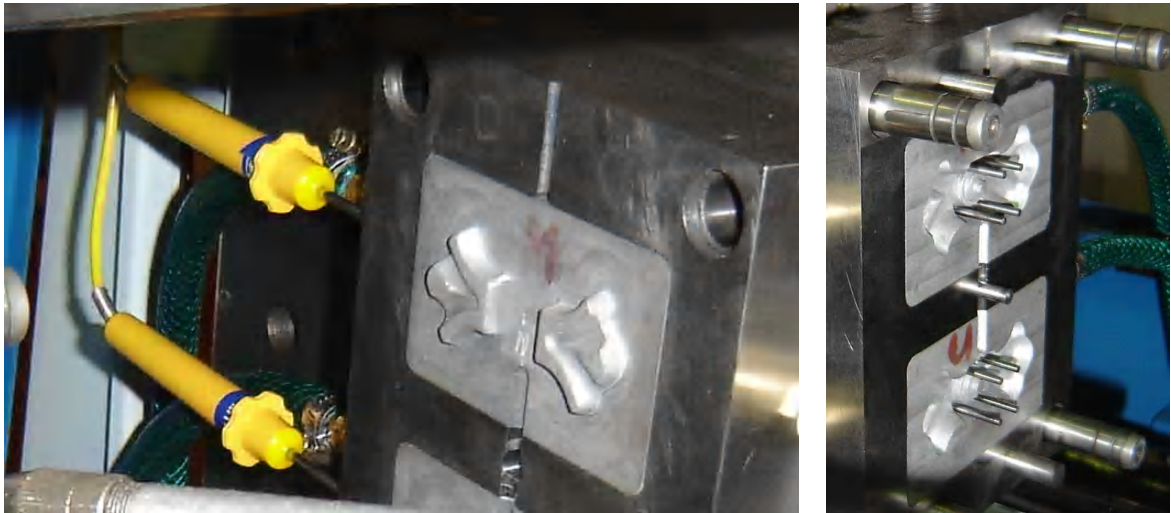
Pictures of the different mould halves, with thermocouples connected
